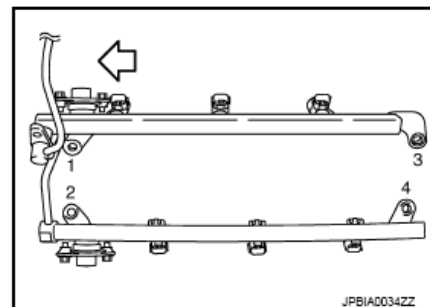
Identifying Fuel Injector And Fuel Tube Mounting Bolts Tightening Sequence
